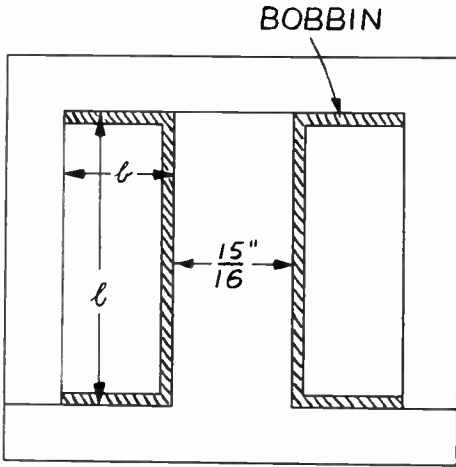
A TRANSFORMER CORE WITH BOBBIN IN POSITION BUILT FROM STANDARD T-U STAMPINGS.
